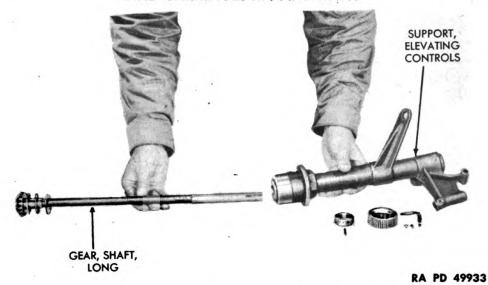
Removing the Long Shaft Gear from the Elevating Controls Support
